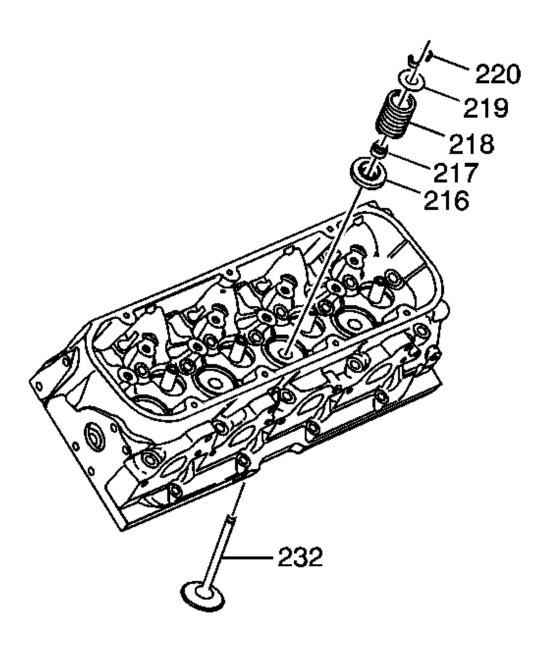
View Of Valve Stems & Components Courtesy of GENERAL MOTORS CORP.
